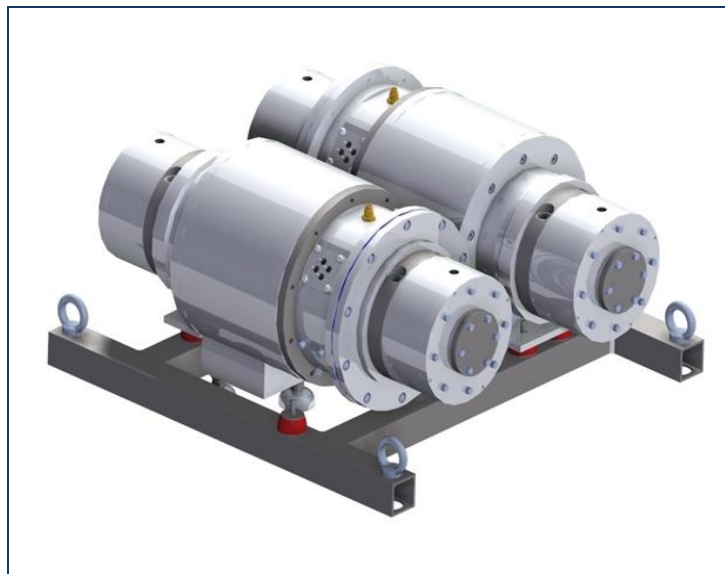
The model of Stirling heat machine based on free swinging piston electrical machine
